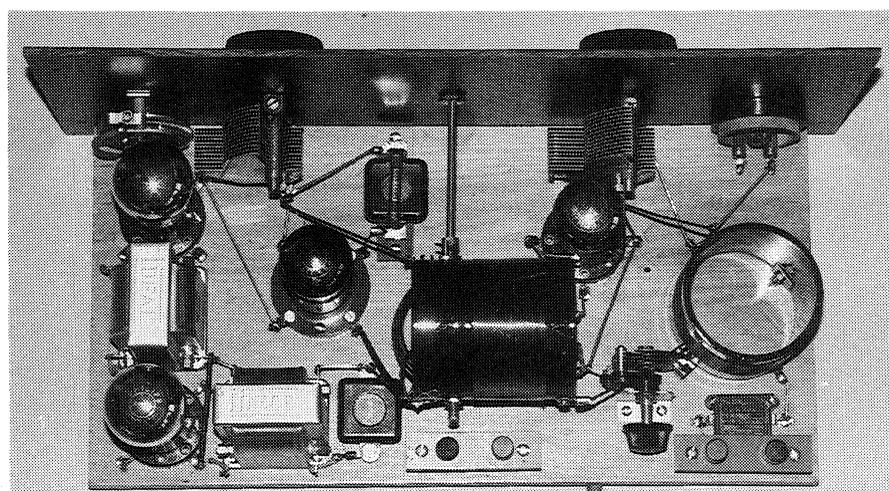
Cabinet and panel dimensions are sufficient to permit a compact but uncrowded layout. The relatively few components are screwed to the baseboard. They can be readily identified, with the aerial coil to the right, the detector coil and valve in the centre and the first audio valve at lower left.
